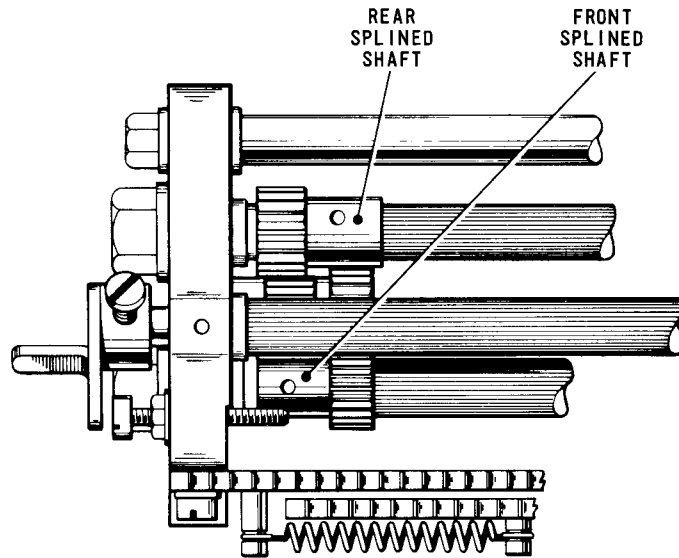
TYPEHEAD CARRIAGE—PLAN VIEW
